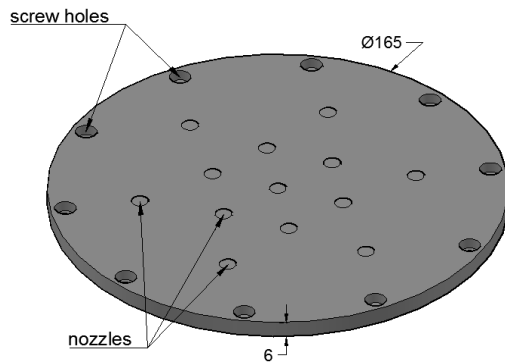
Seal of the air-bearing device and the position of the nozzles (dimensions in mm)
